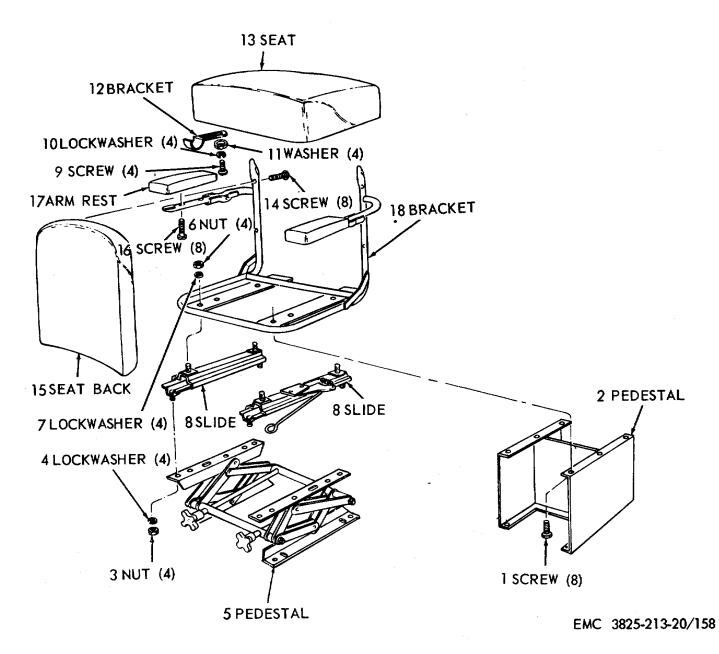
Carrier and plow operator's seat assembly, disassembly and reassembly, exploded view.
